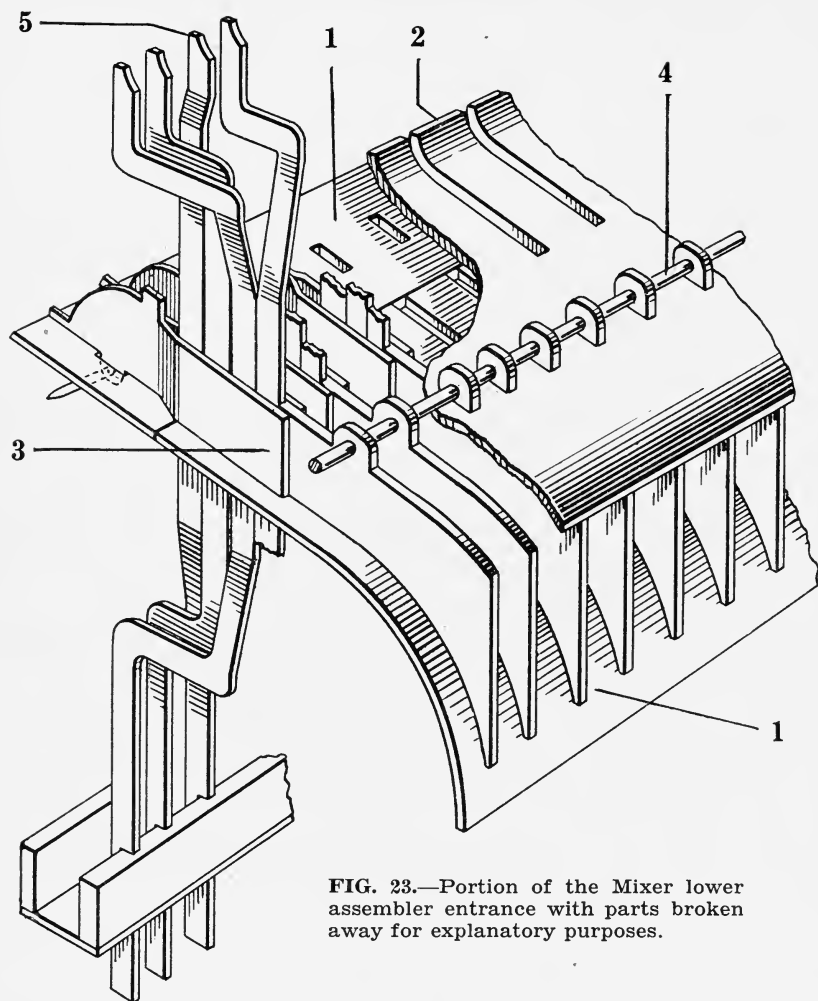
Portion of the Mixer lower assembler entrance with parts broken away for explanatory purposes.
